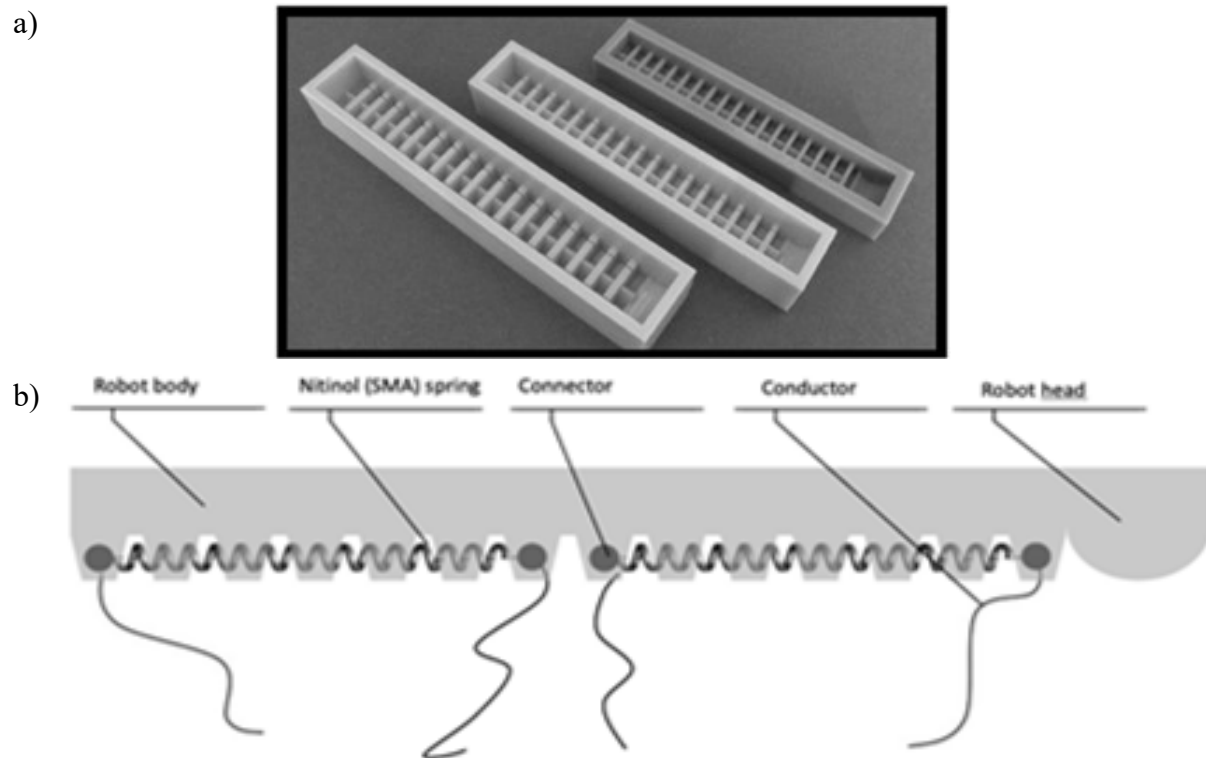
a) Different 3D printed moulds used for experiments, b) robot model with components.
